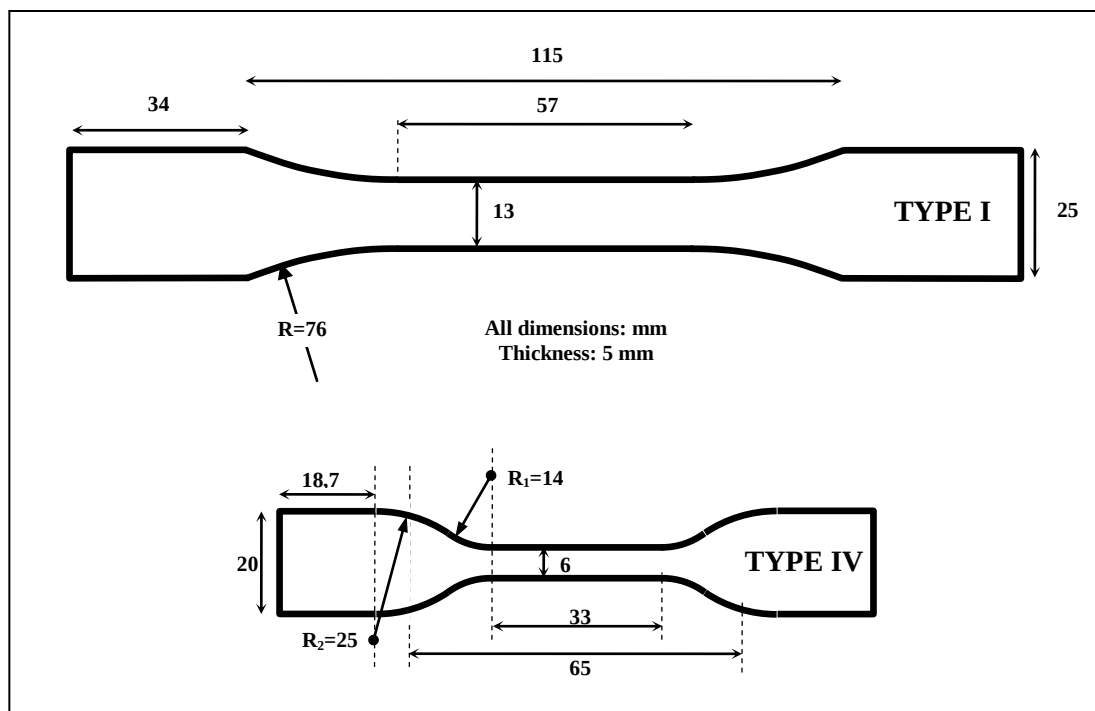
Type I and Type IV specimen shapes and dimensions of ASTM D638
